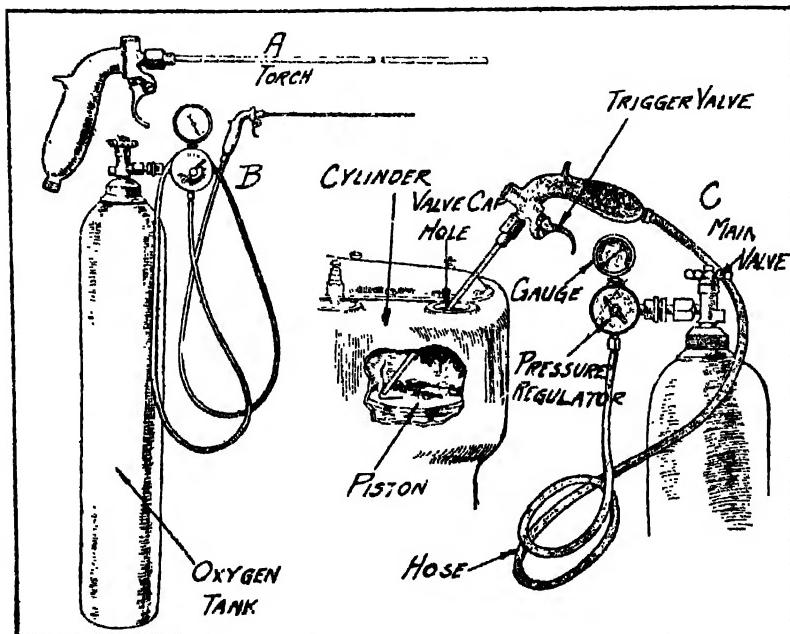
How Oxygen May be Used to Remove Carbon by a Combustion Process.
